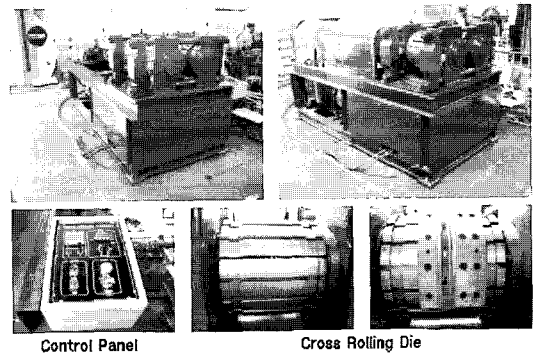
Equipment of the developed cold cross wedge rolling machine
